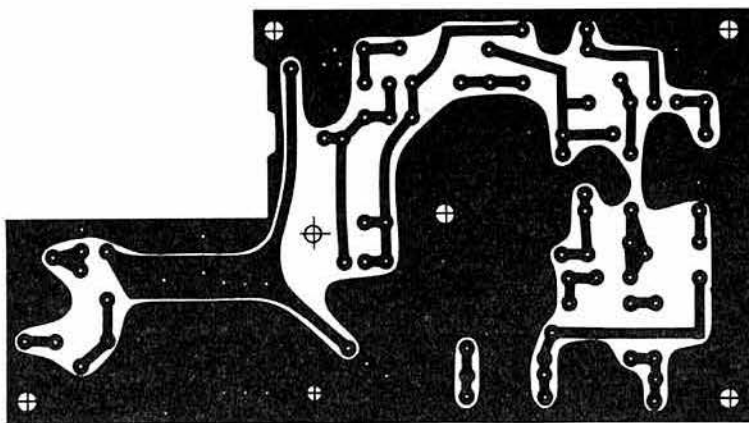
PCB layout of Fig 9. PCB 3-75 by 2-062in single-sided
